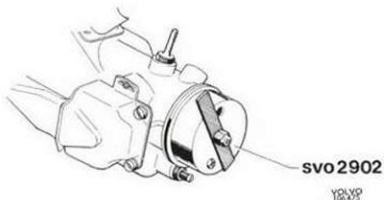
Tools for adjusting engine speed during ignition setting, B 20 E, B 20 F
